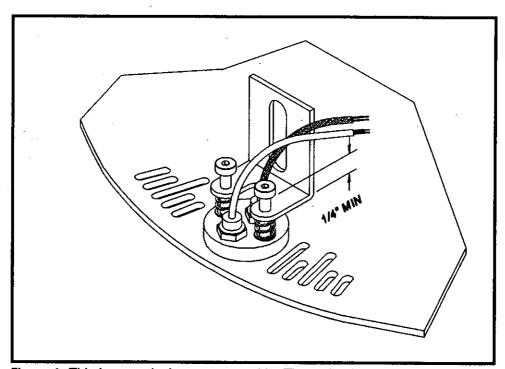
This is an typical sensor assembly. The spring loaded sensor pad must have at least 1/4" compression and slide freely to properly read the codewheel.
